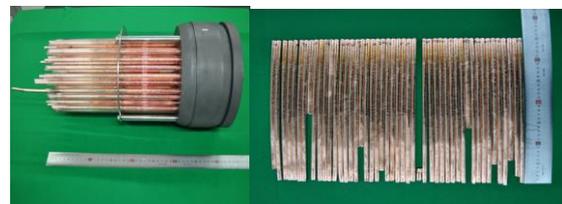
Mold bundle after casting(left) and Cu slug after mold removal(right)
